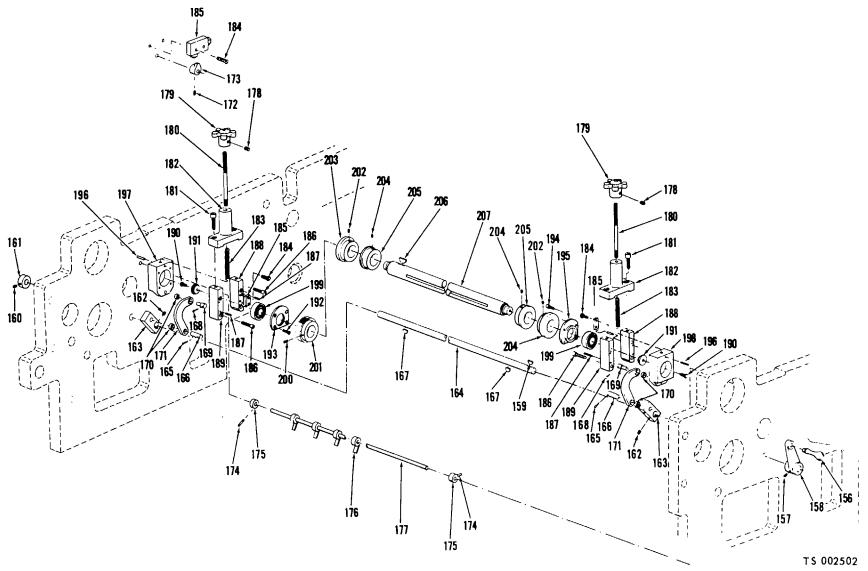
Trolley, paper guide and nipping roller alignment assembly (Sheet 6 of 7). 4-100
